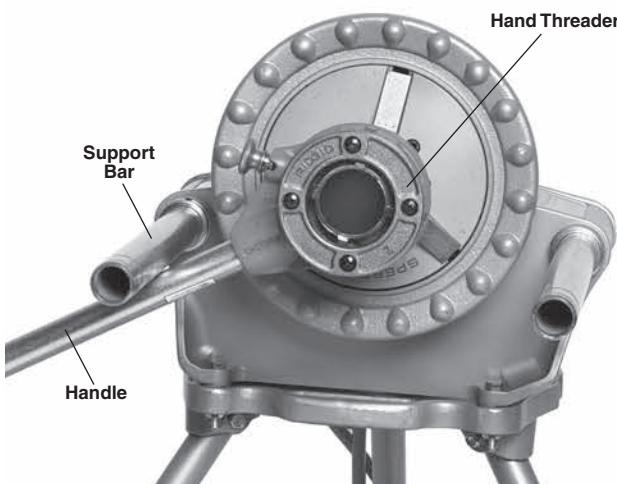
Removing Die Head From Threaded Pipe (Handle Against Bottom of Bar.)
